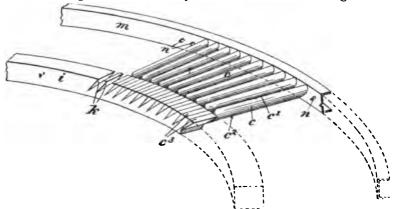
Perspective View of Ring of Blades in an Annular Groove in Rotary Spindle of a Turbine,
